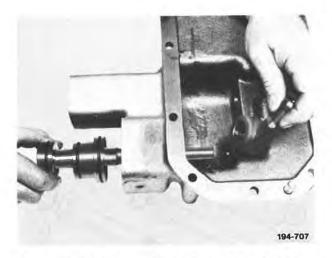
Removing Shift Rail and Shifter 20. Remove Direct piston from Lo/Direct shift rail. See Figure 5-343.
